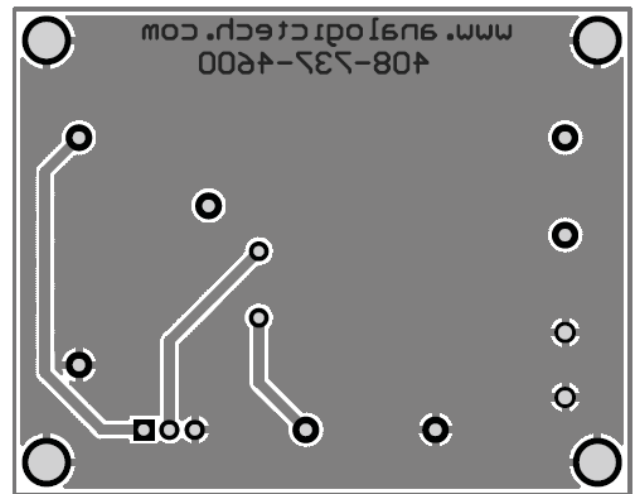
AAT4910 Evaluation Board Bottom Side Layout.
